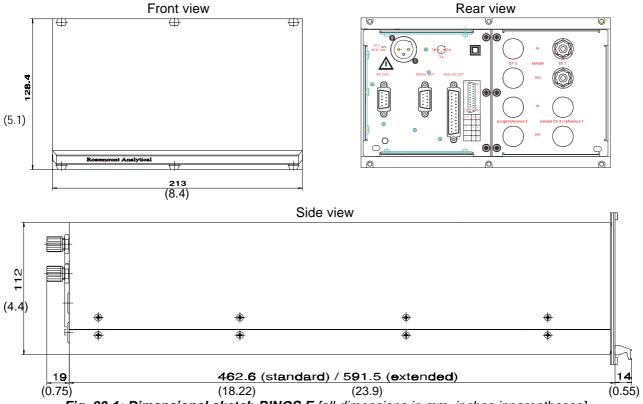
Dimensional sketch BINOS E [all dimensions in mm, inches inparentheses]
